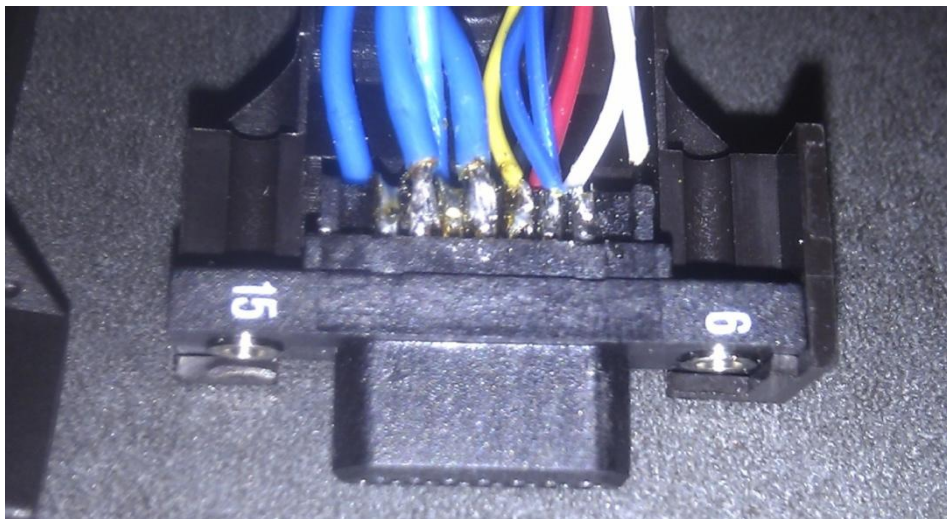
The blue and the white wire on the right have fractured inside a tiny fragile socket.
